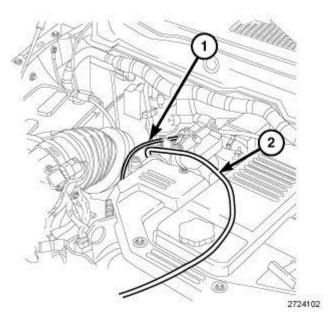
Cleaning Tool Hose Courtesy of CHRYSLER GROUP, LLC
